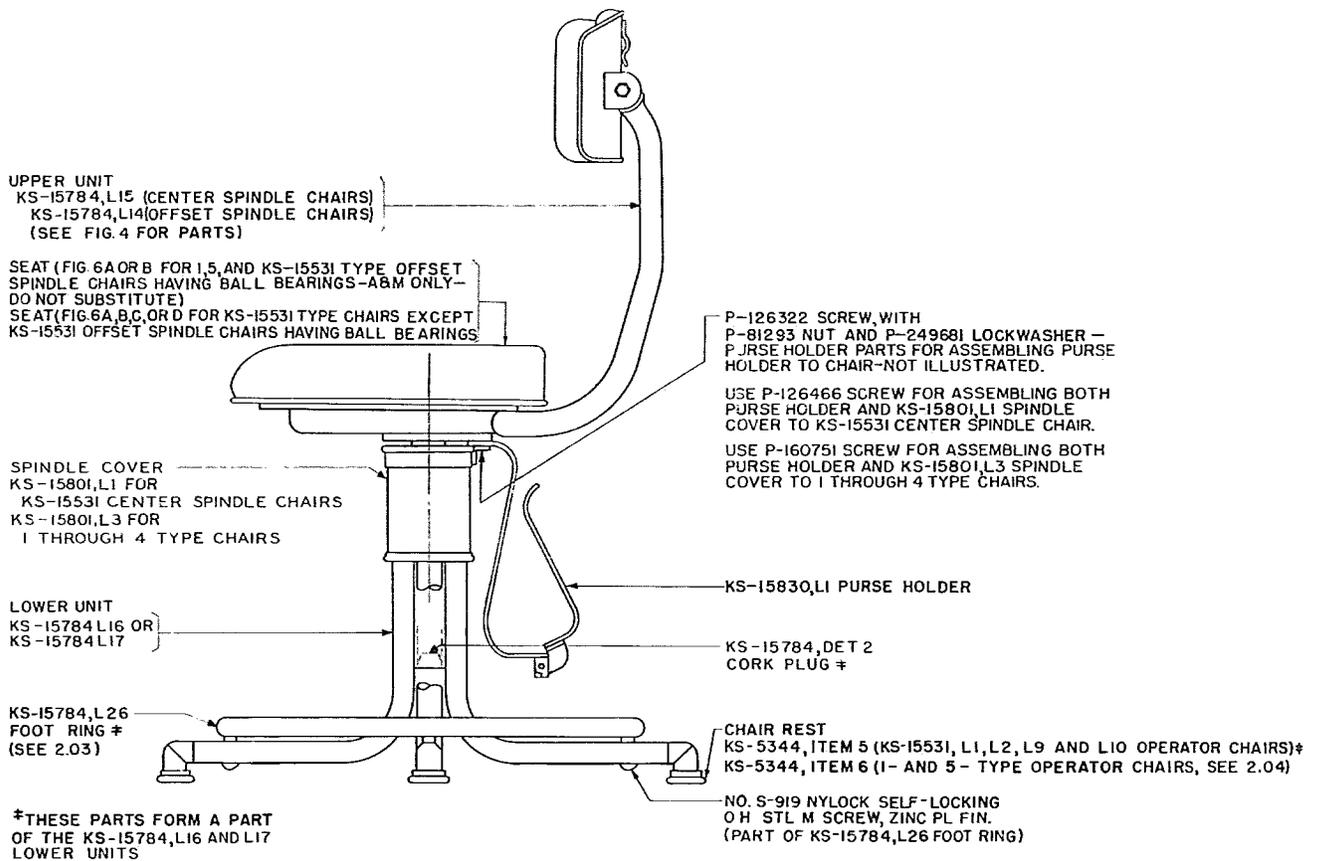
Piece-part Information for KS-15531-type 17-inch Operator Chairs (Illustrated), and 1- and 5-type Operator Chairs
